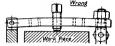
CLAMPING SCREW DESTROYS PARALLELISM OF AXES OF BUSHINGS
